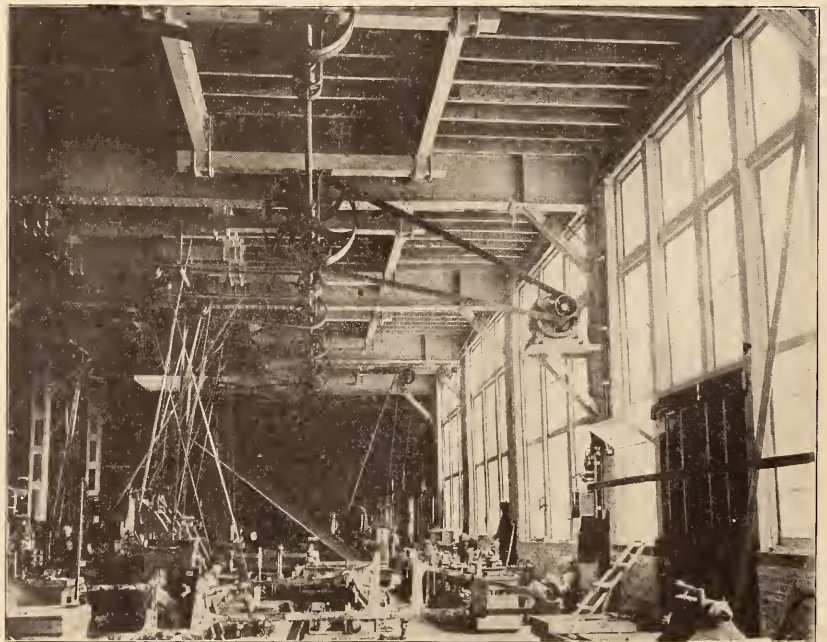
SHOWING ARRANGEMENT OF MOTOR DRIVE FOR
